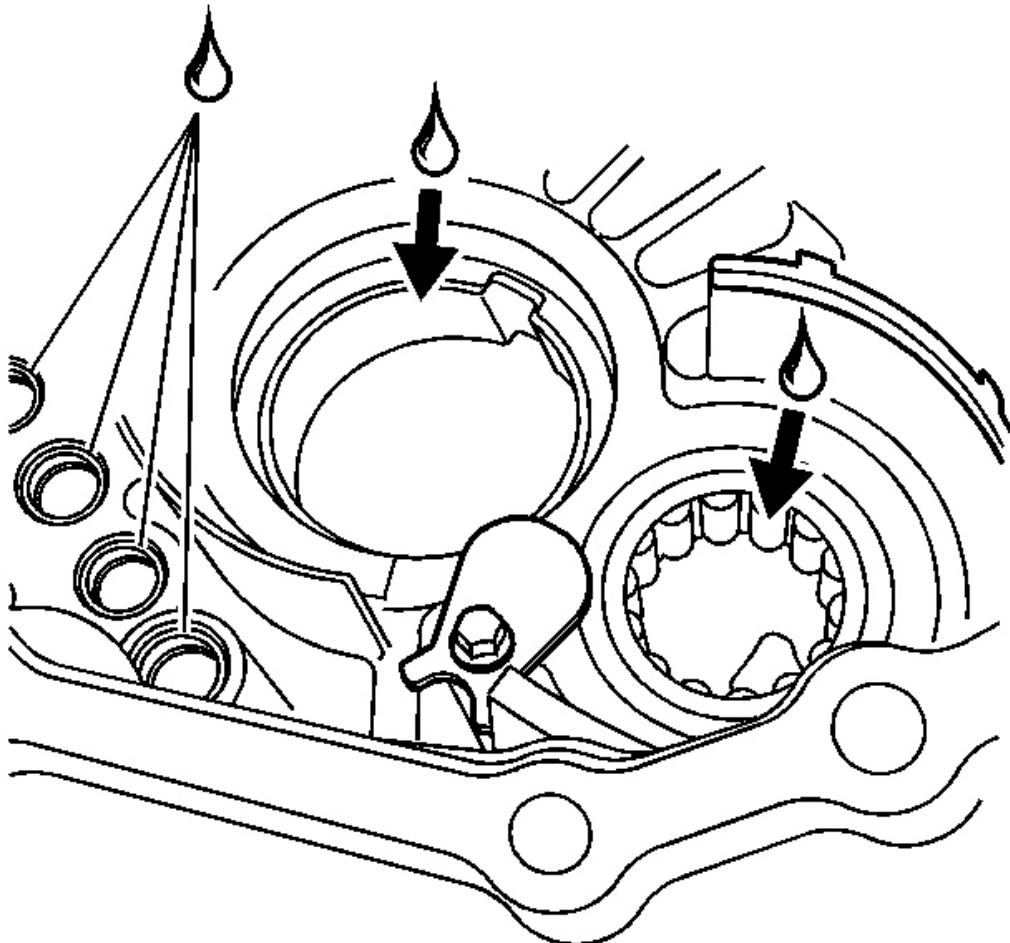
Applying Lubricant To Cylindrical Roller Bearing, Outer Race & Control Sub-Assembly Holes
